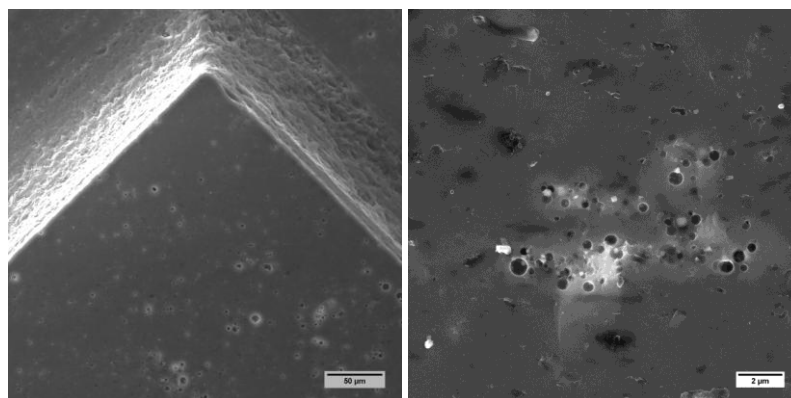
Presence of holes in the fracture surfaces of BS-BNNT composites; a) notch tip and b) detail view of pores
